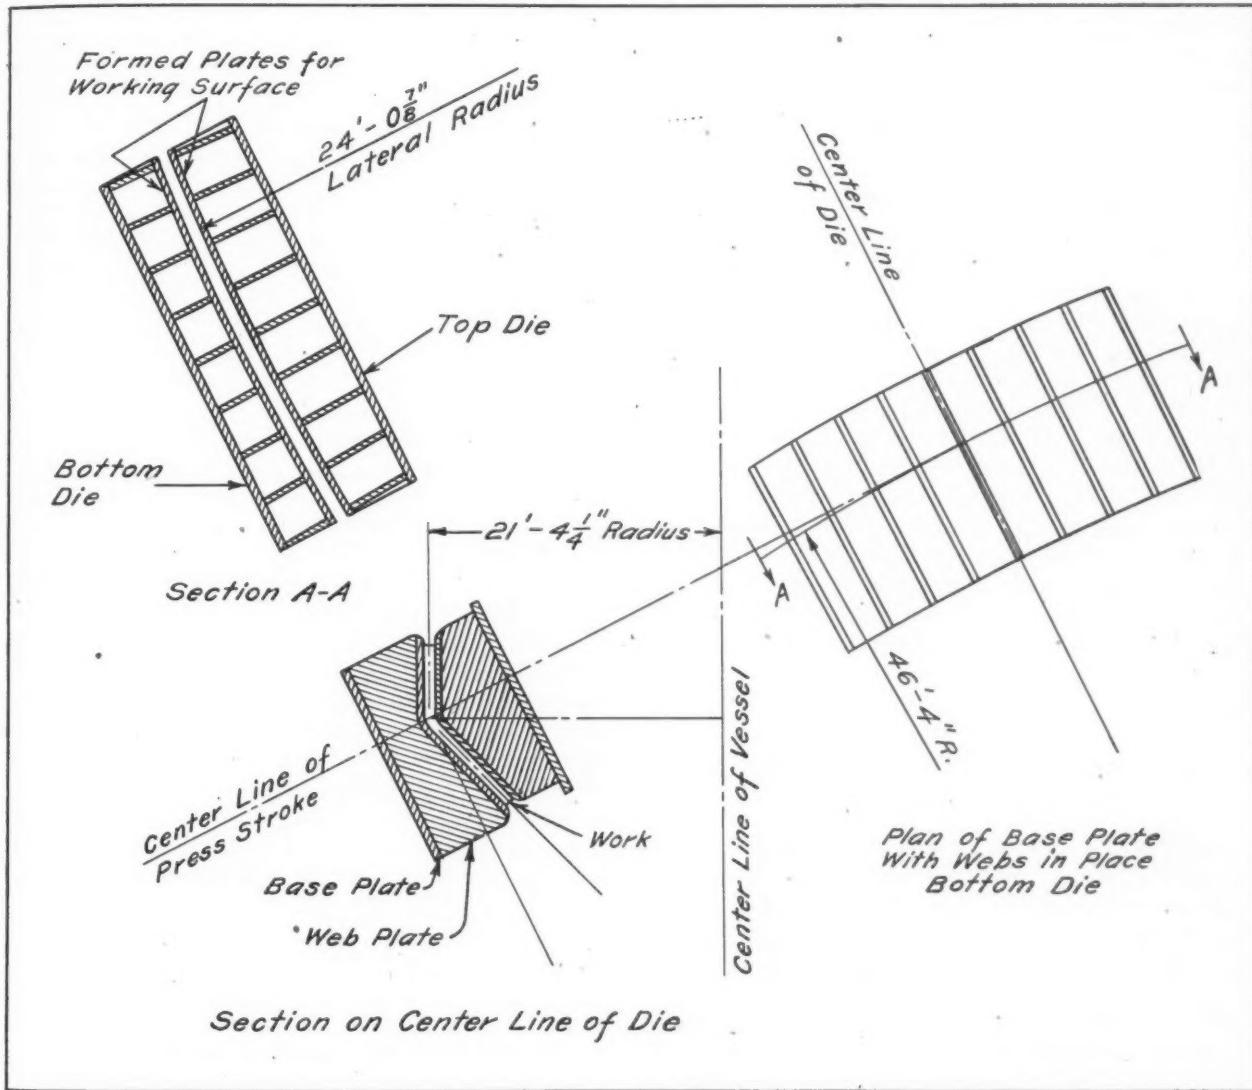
Diagrams Illustrating Methods of Laying out and Constructing Welded Steel-plate Dies for Forming Segments of Reinforcing Band Having Cross-section Indicated by A, Fig. 1
